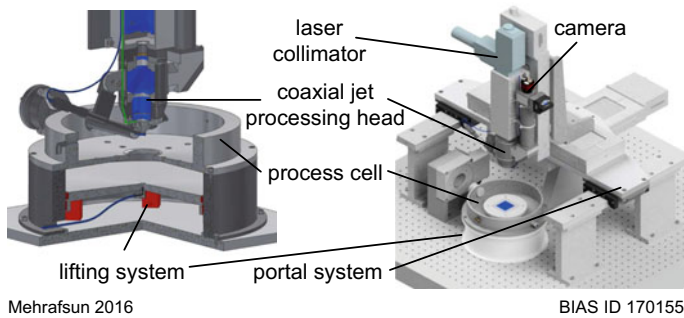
JLCM system with integrated image processing for automatic workpiece alignment
